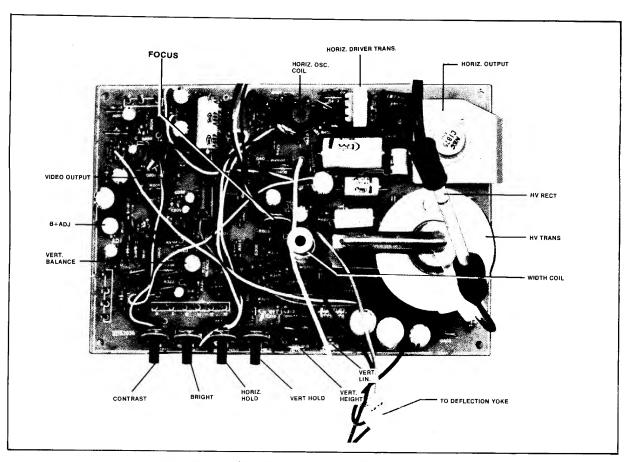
TEC Monitor Printed Circuit Board, Top View
